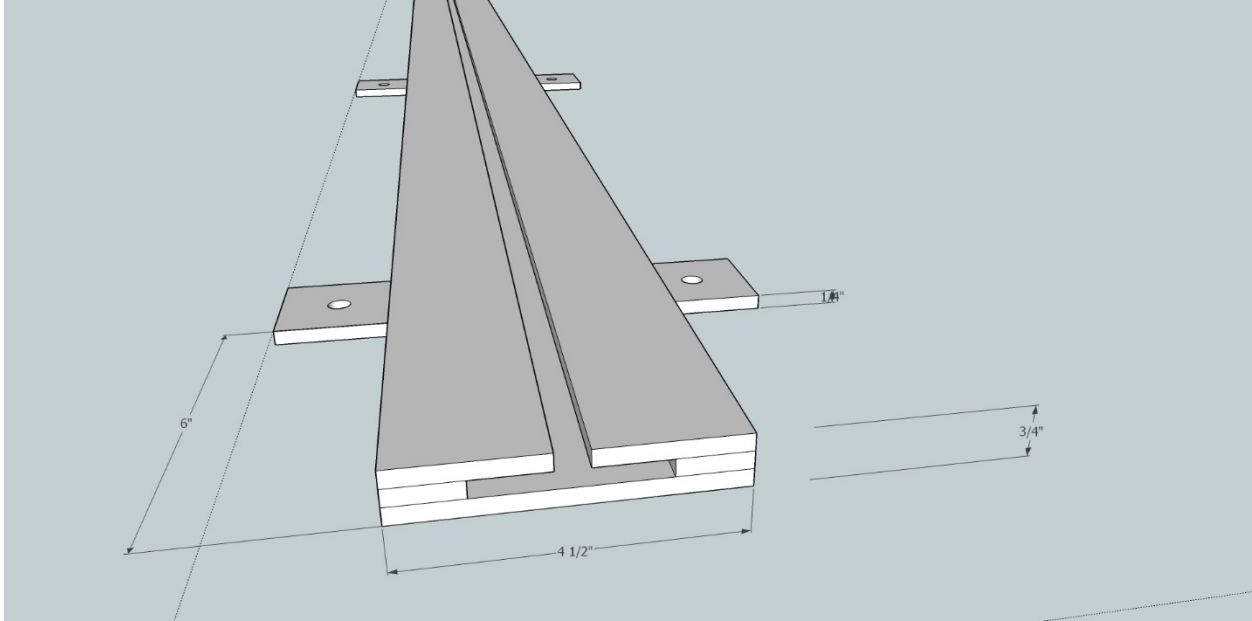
Detail of mounting channel showing slot for camera I-beam. The channel will be constructed from  $\frac{1}{4}$ " sheet aluminum welded into a laminate. The channel will be mounted at least one foot above the fishway floor. A stop will prevent the i-beam from extending below the channel (not shown). Mounting tabs will be a minimum 24" O.C. and rails will be anchored with  $\frac{1}{4}$ " SS Hilti bolts with an embedded depth of  $\sim 2$ " each. I-beams will be placed in area out of the direct flow as shown in Figures 1 and 2.
